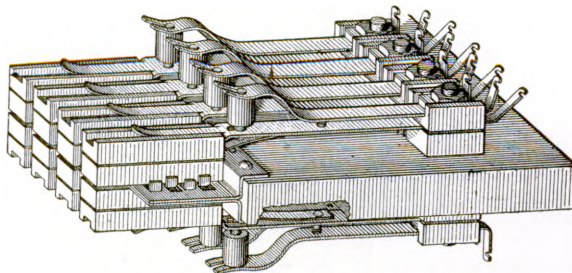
SWITCHBOARD, TELEPHONE, WESTERN ELECTRIC PROTECTOR, DETAILS.
